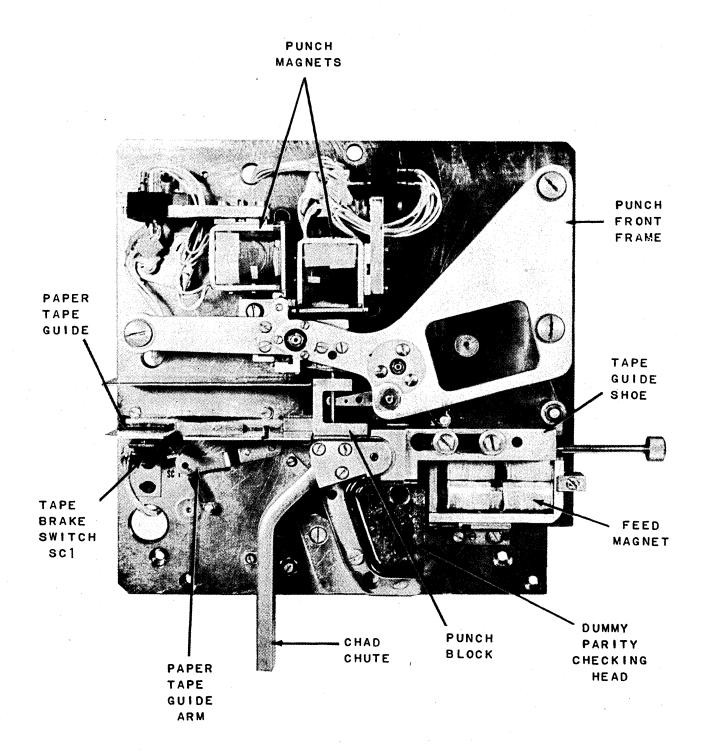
PUNCH HEAD, FRONT VIEW.
